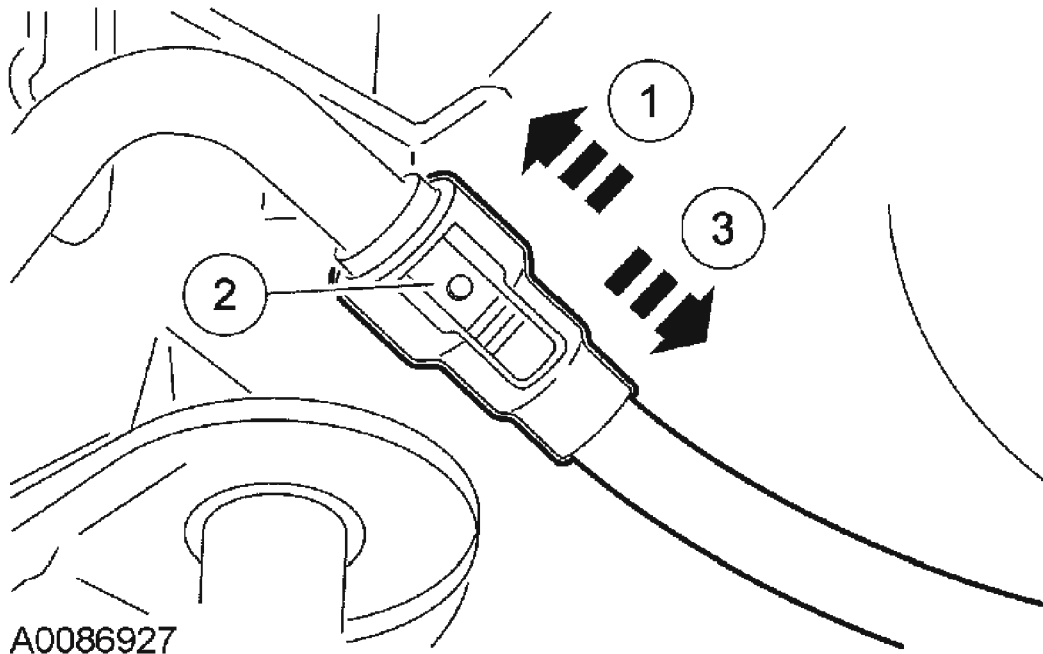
Disconnecting Transmission Fluid Cooler Tubes
